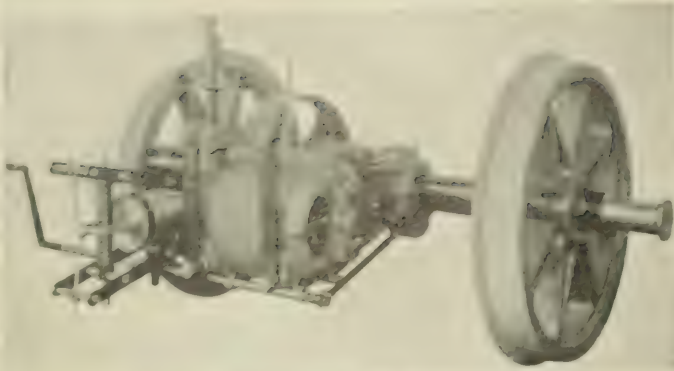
DETAIL VIEW OF FRICTION GEAR.
